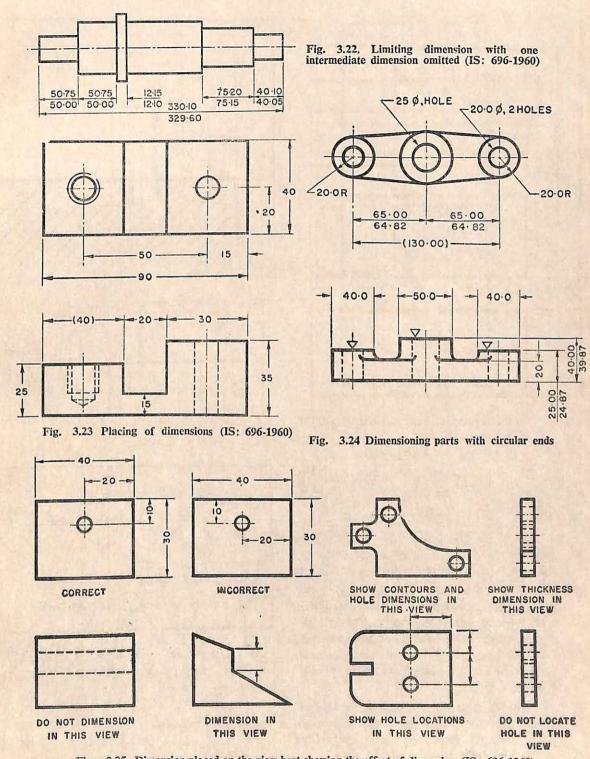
Dimension placed on the view best showing the effect of dimension (IS: 696-1960)
